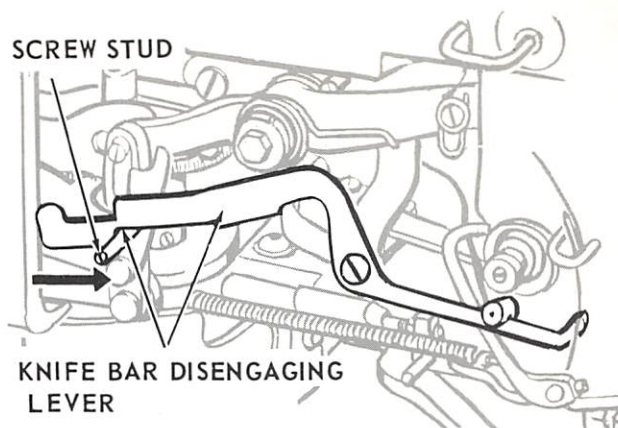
Knife Bar Disengaging Lever Screw Stud
